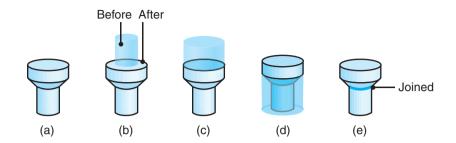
Various methods of making a simple part: (a) casting or powder metallurgy, (b) forging or upsetting, (c) extrusion, (d) machining, and (e) joining two pieces.
